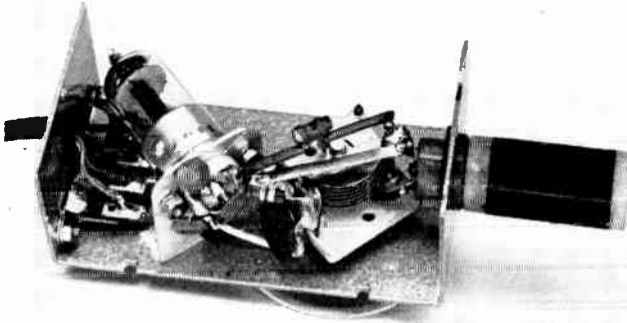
The grid-dip oscillator is built on the U-shaped portion of the box. C_3 , C_4 and C_6 are grounded to a soldering lug at the left of the socket. Wires in the power and meter cable terminate at a 4-point terminal strip at the left.
